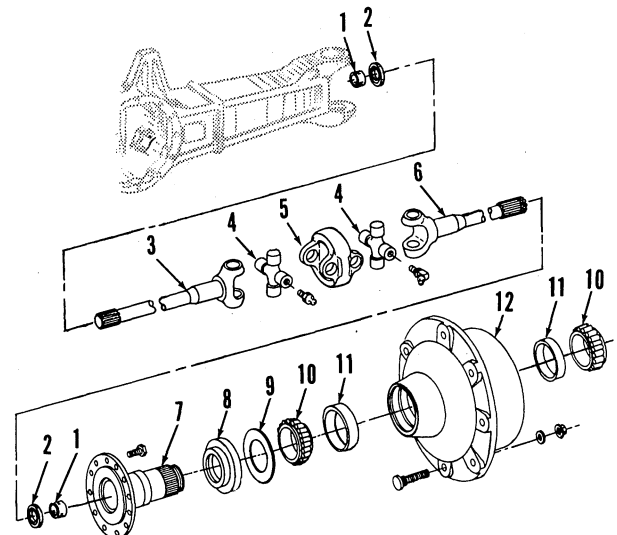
Exploded view of wheel hub assembly and axle shaft assembly. Washer (9) is not used on 4650 and 4850 tractors.
